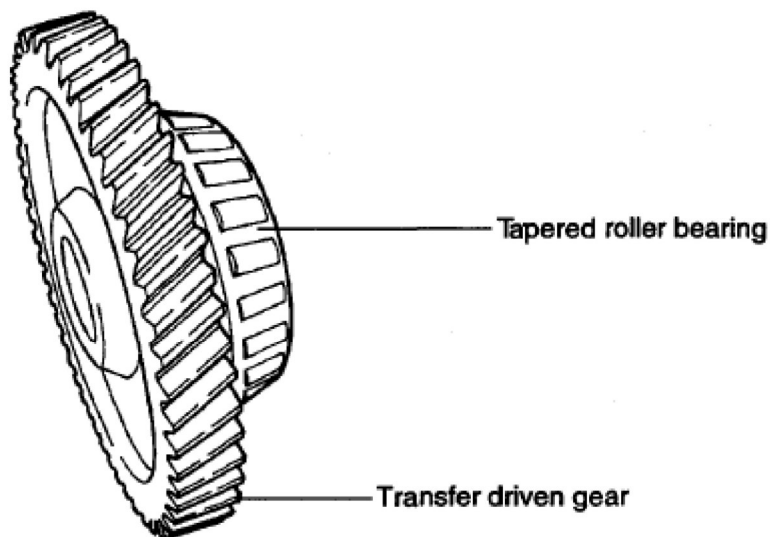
Identifying Transfer Driven Gear & Tapered Roller Bearing
